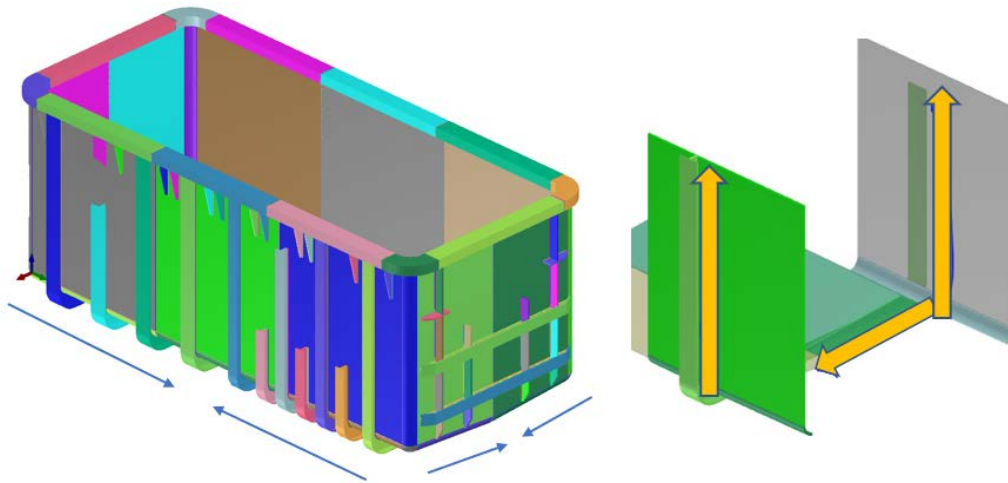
shows the clamped condition of stiffeners during stiffeners welding to the main shell. Welding sequence are also staggered as shown in fig 43 to control the weld distortion. The small stiffeners near the top flange shall be welded at the end.
